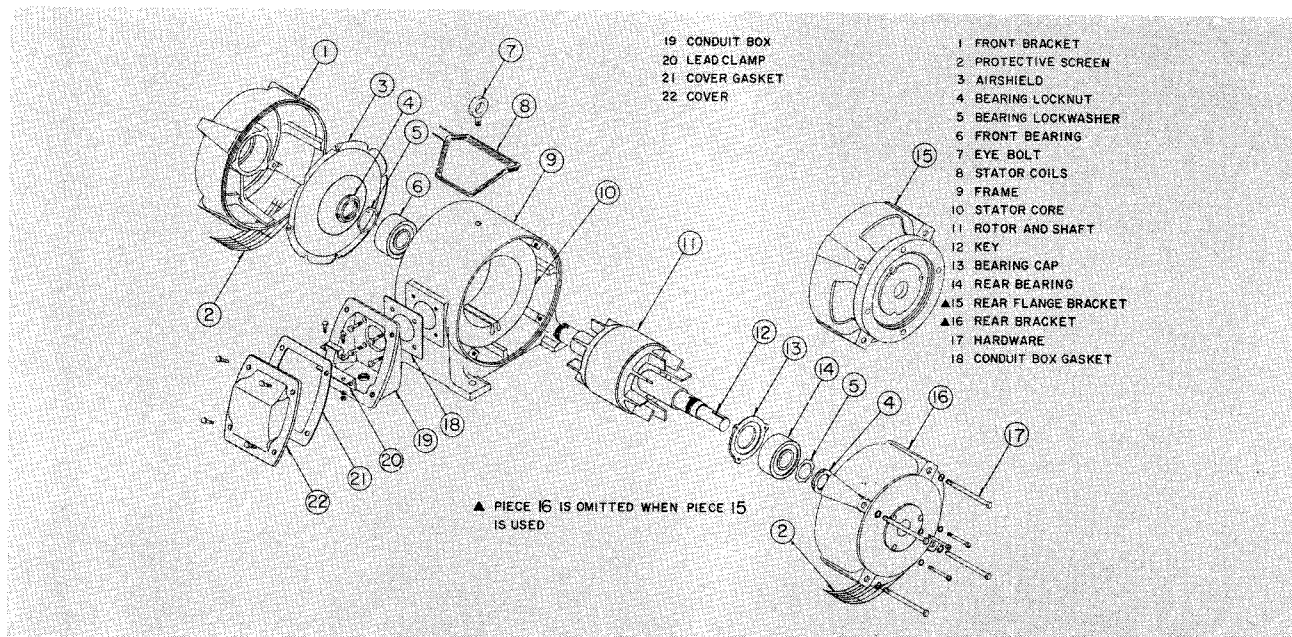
Arrangement of Parts*—Drip-Proof Motors
